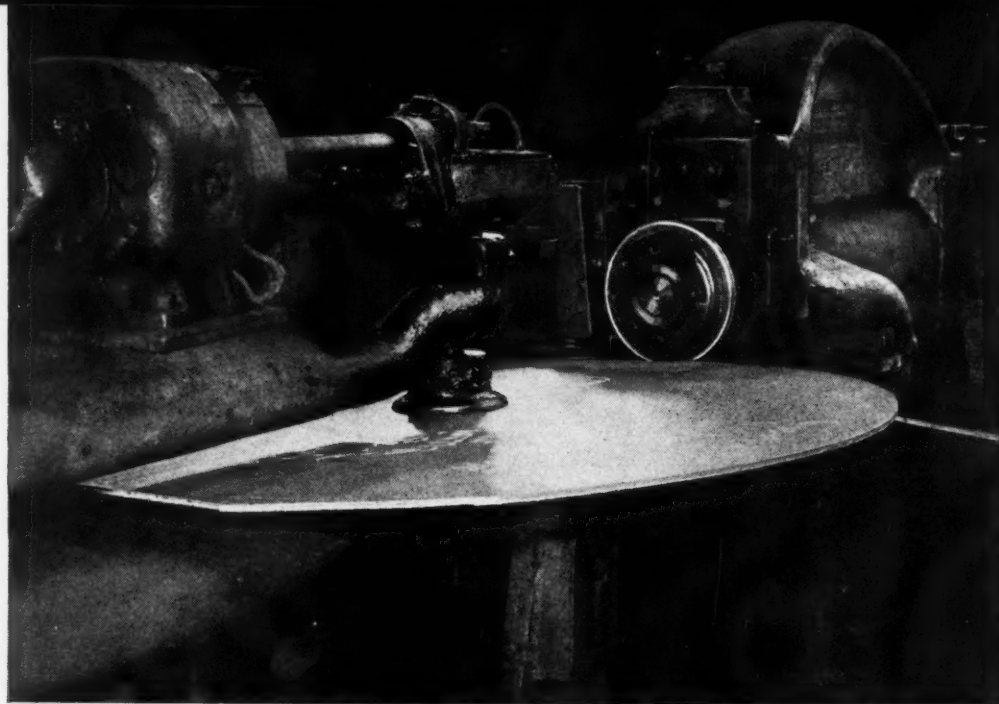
Flame-cutting a Large Disk from a Heavy Steel Plate for Subsequent Spinning into a Pressure Head
